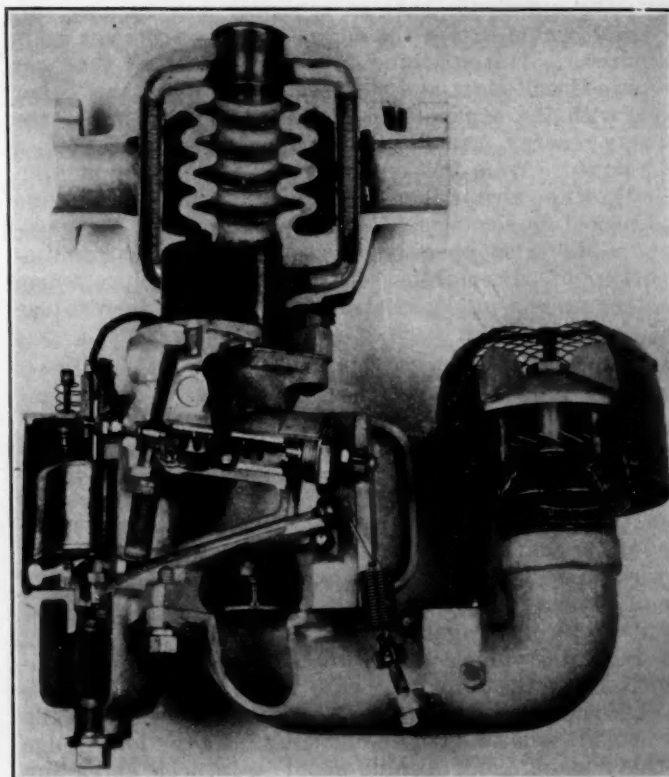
A VIEW OF THE CARBURETER PARTIALLY CUT-AWAY TO SHOW THE ELECTRIC HEATING ARRANGEMENT PROVIDED FOR USE IN COLD WEATHER
